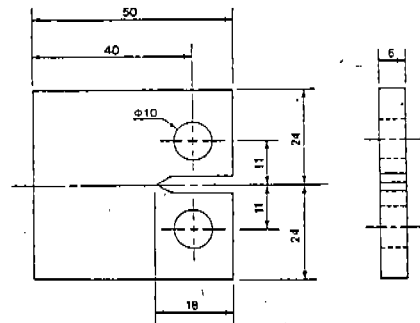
Geometry of compact tension specimen; Dimensions in mm
